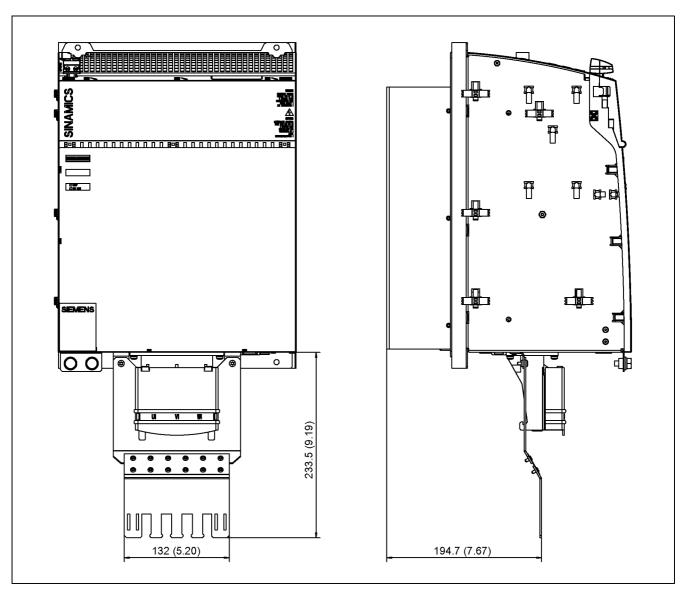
Dimension drawing of shield terminal plate on a 300 mm component (Line Module or Motor Module) with external air cooling
